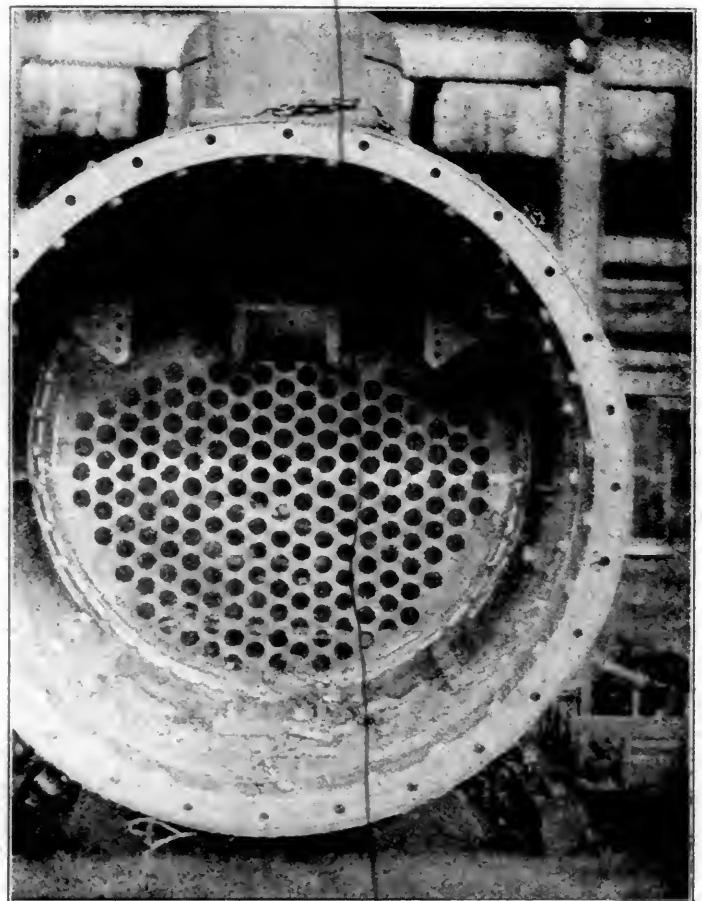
Front Tube Sheet Repaired by the Oxy-Acetylene Process
